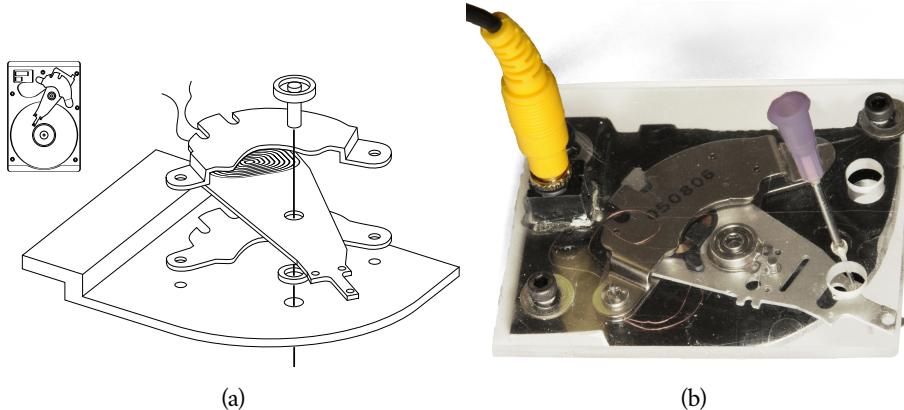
(a) top view of a hard drive and exploded view of the cut-out base plate, actuator arm, axis, and magnet assembly; (b) assembled droplet generator with cover plate and nozzle inserted through actuator arm.
